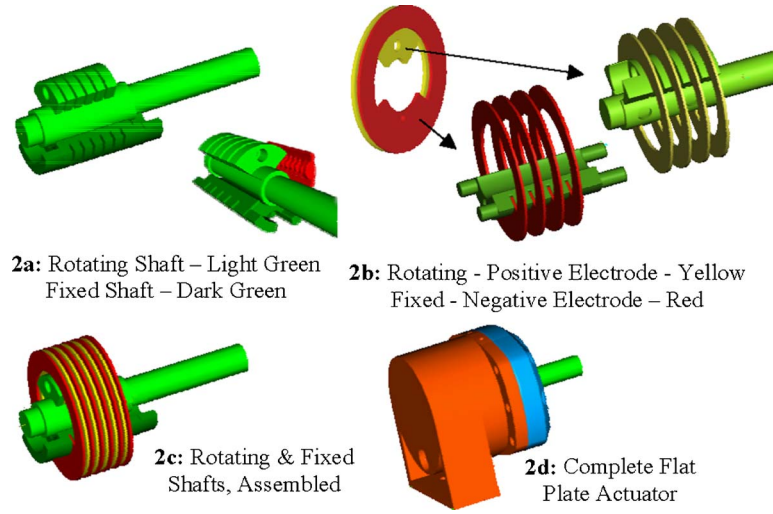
Components and assembly steps for the flat plate resistive actuator
